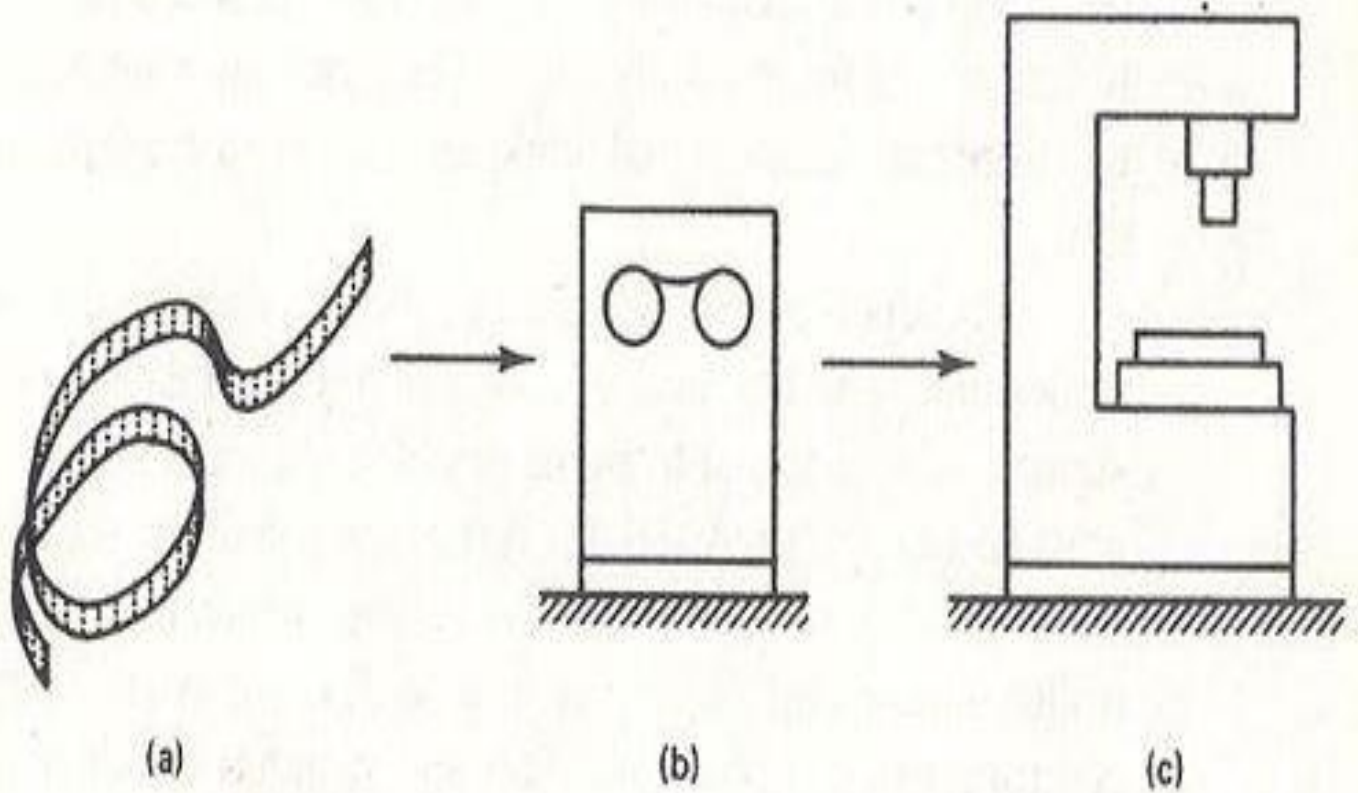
Three basic components of a numerical control system: (a) program of instruction; (b) controller unit; (c) machine tool.
